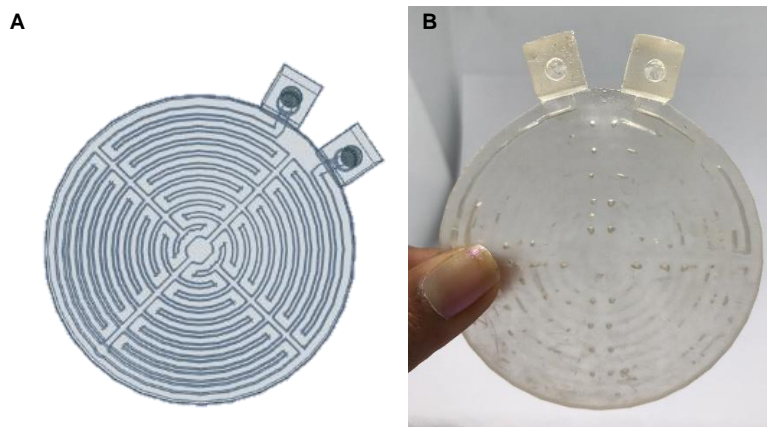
A) CAD drawing of circular hotplate reactor design 6; B) Printed circular hotplate reactor design 6 showing over-polymerization.
